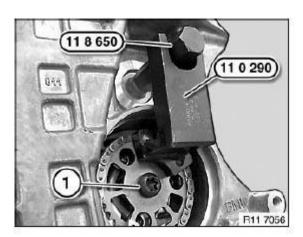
Identifying Special Tool (11 0 290) On Sprocket Wheel Courtesy of BMW OF NORTH AMERICA, INC.
